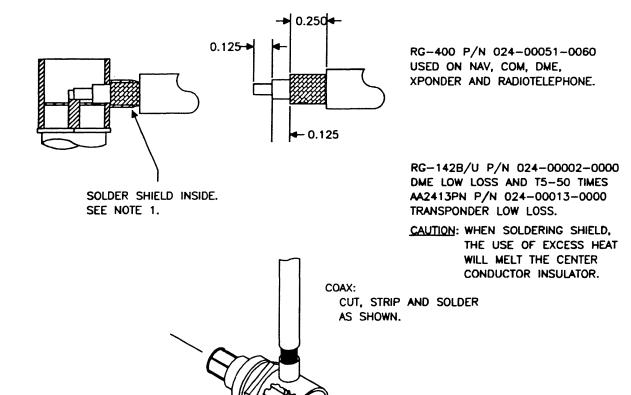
KY 96A, KY 97A Installation Assembly Drawing (Dwg No 155-05690-0000 Rev 4)
